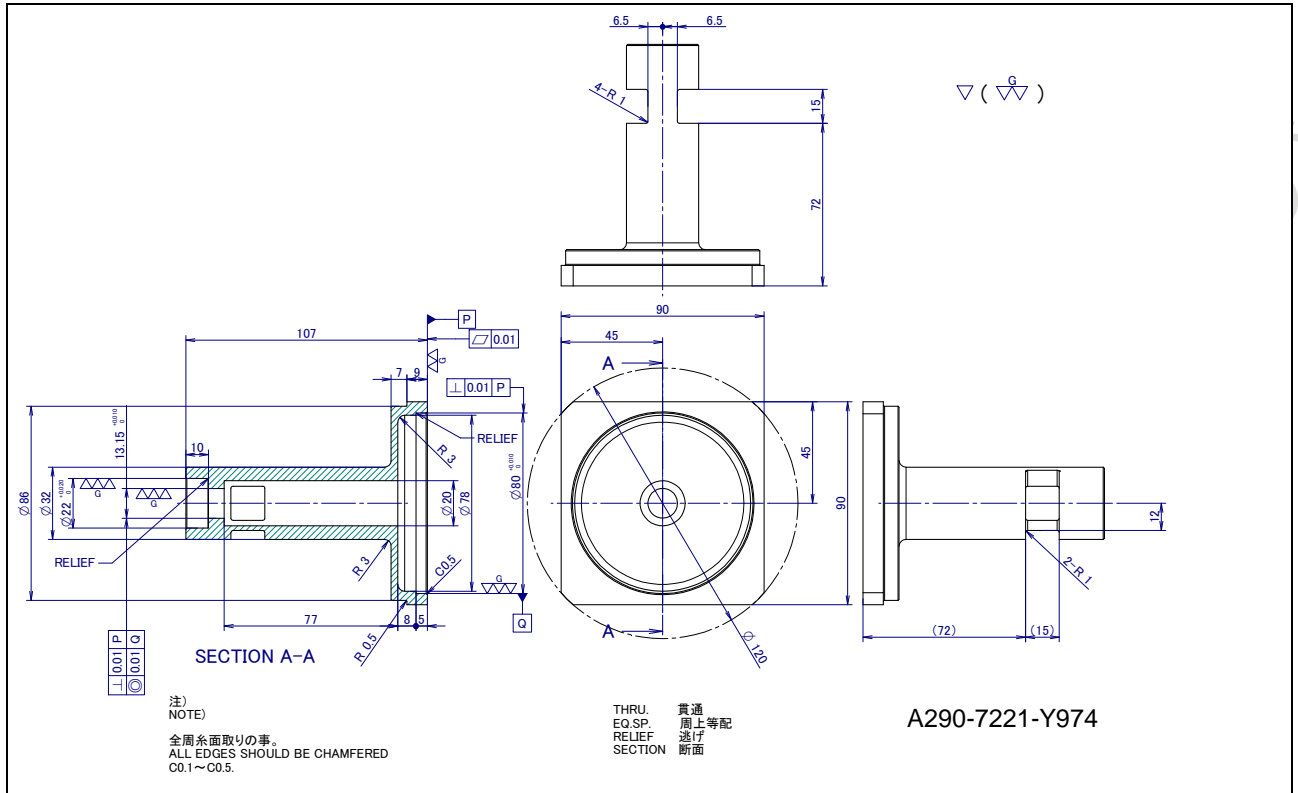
(e) Mounting fixture for gear of J3-axis motor
